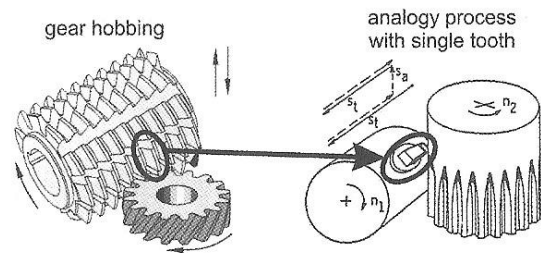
Gear hobbing represented by a single tooth fly-cutting analogous process
